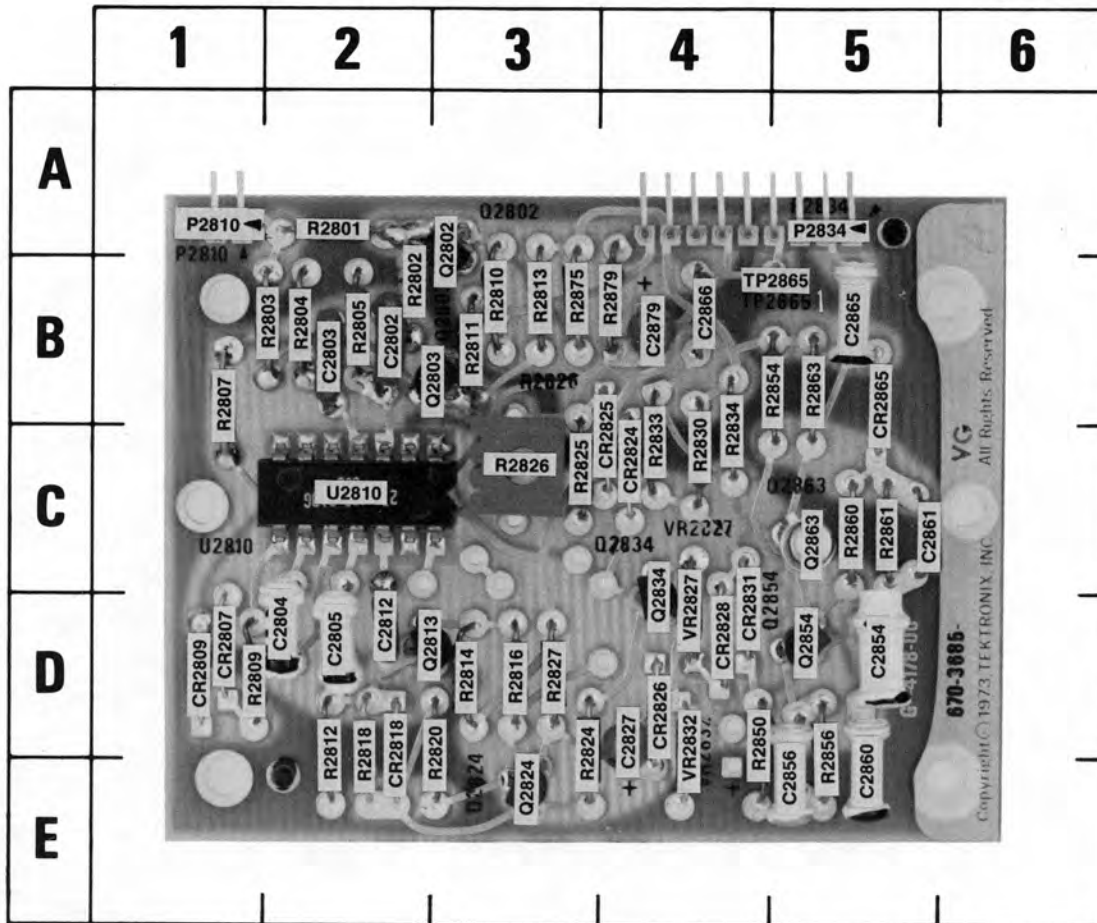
A12 TV Sync Separator & Inverter Ampl board component locations.
